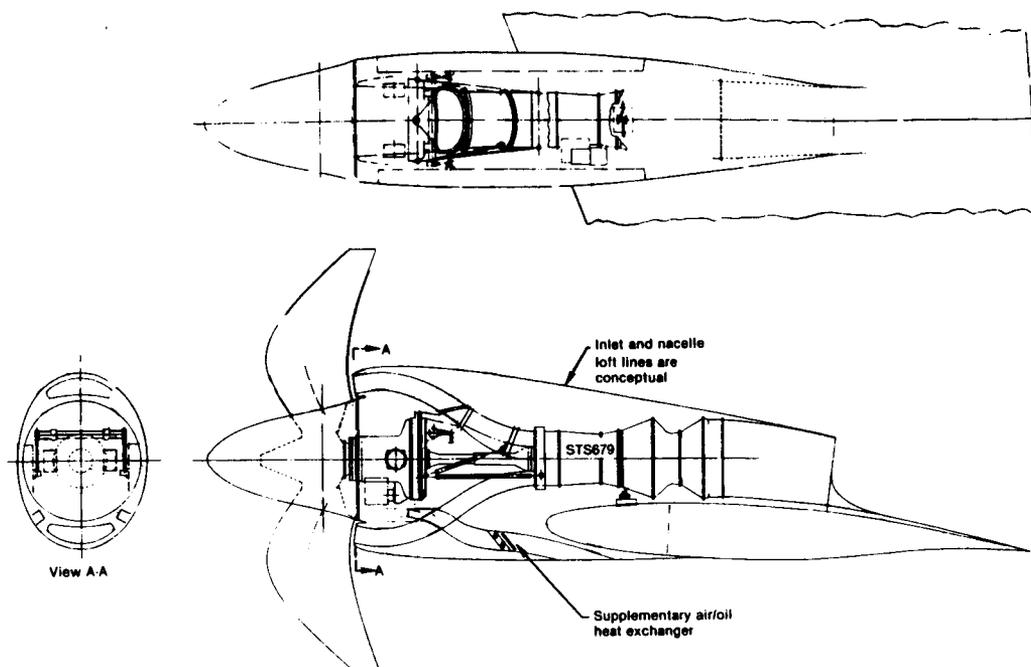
Conceptual Nacelle Design for an In-Line Gearbox Installation - This design has a 0.28 diameter ratio, due to the slimmer in-line gearbox. (J27638-122)
